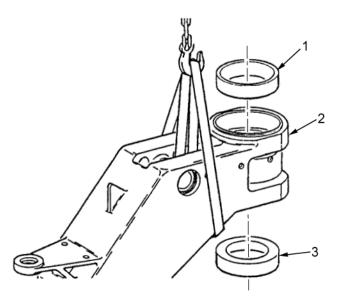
Lubricating Fitting and Bearing Cone Removal.
